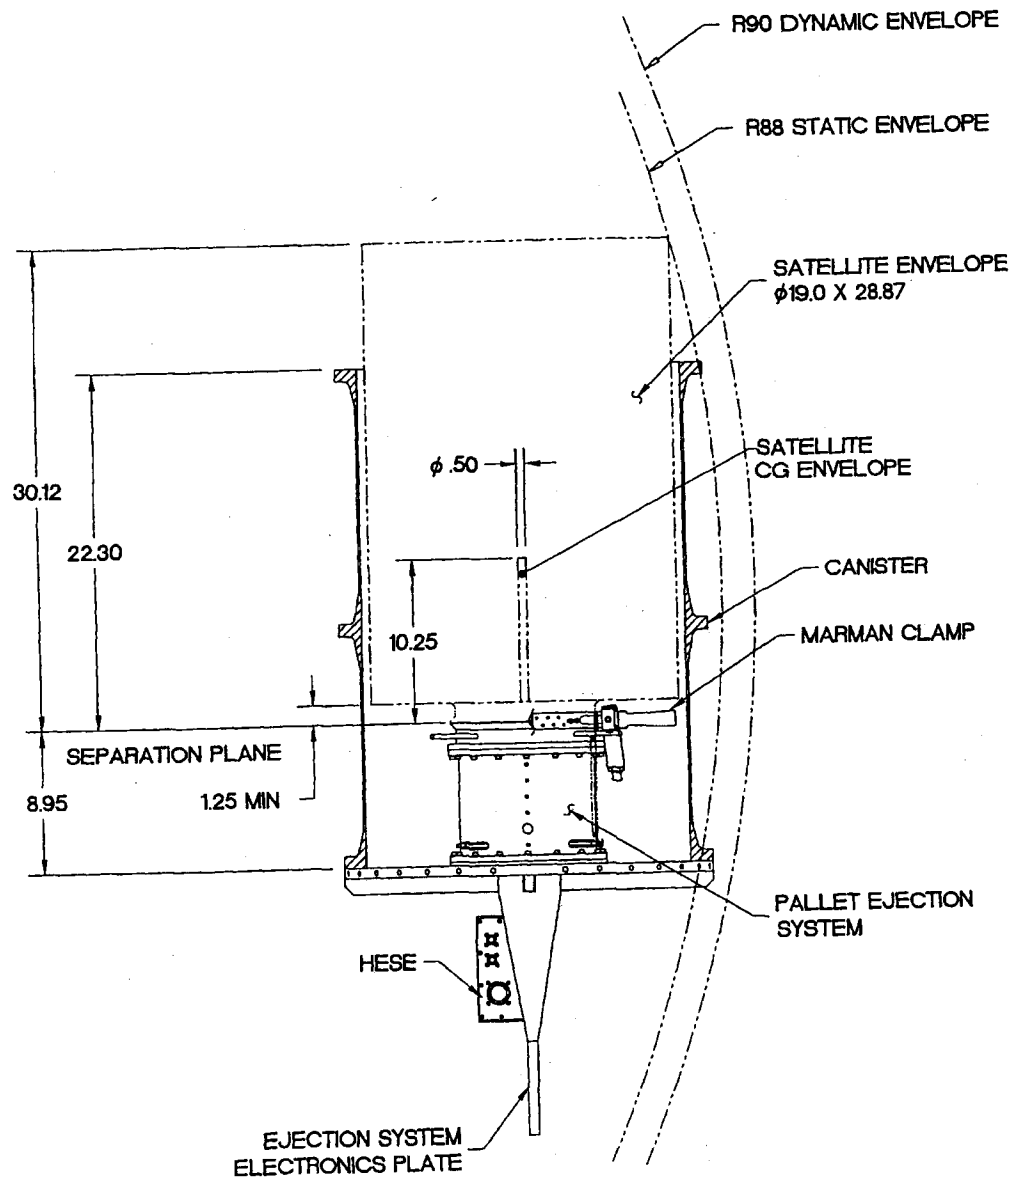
PALLET EJECTION SYSTEM WITH OPEN CANISTER
